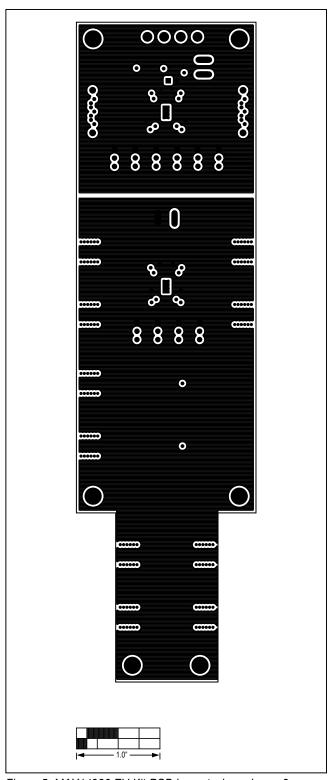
MAX14986 EV Kit PCB Layout—Inner Layer 3
